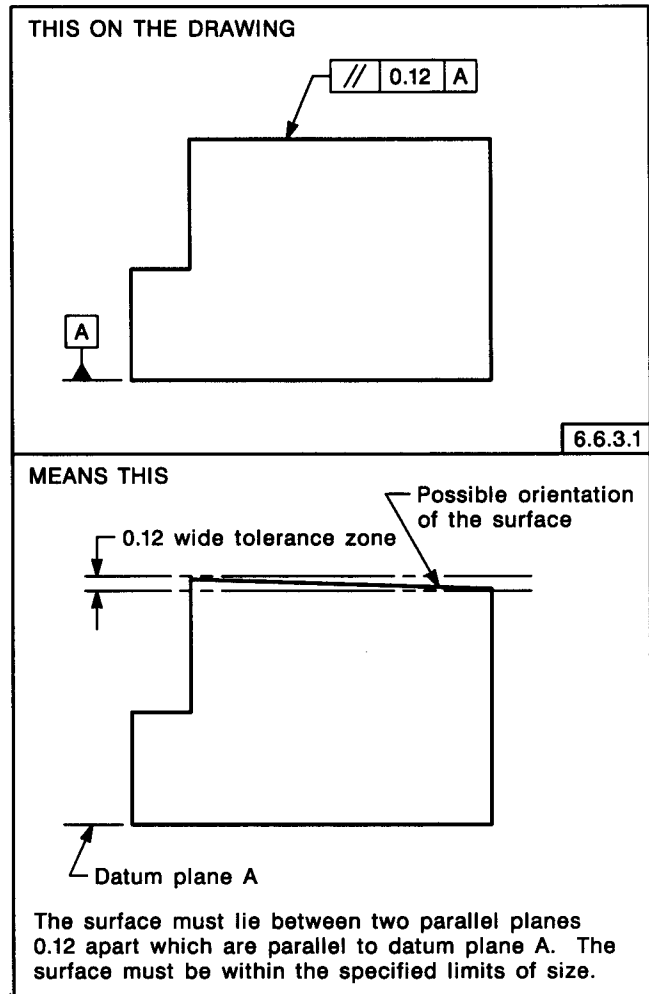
SPECIFYING PARALLELISM FOR A PLANE SURFACE
